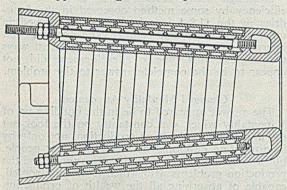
Cross-section of the Specially Designed Watercooled Blast-furnace Tuyere.
